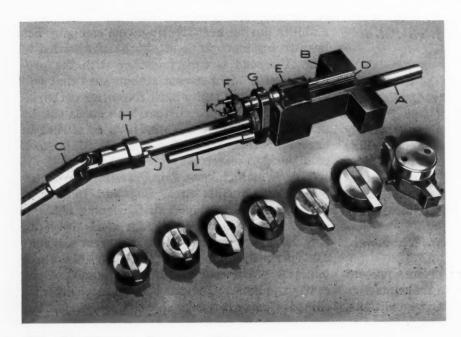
Portable Jig Boring Tool Consisting Essentially of Boring-bar A, which is Rotated in Stationary Block B by Universal-joint Drive C, and Fed by Lead-screw D
